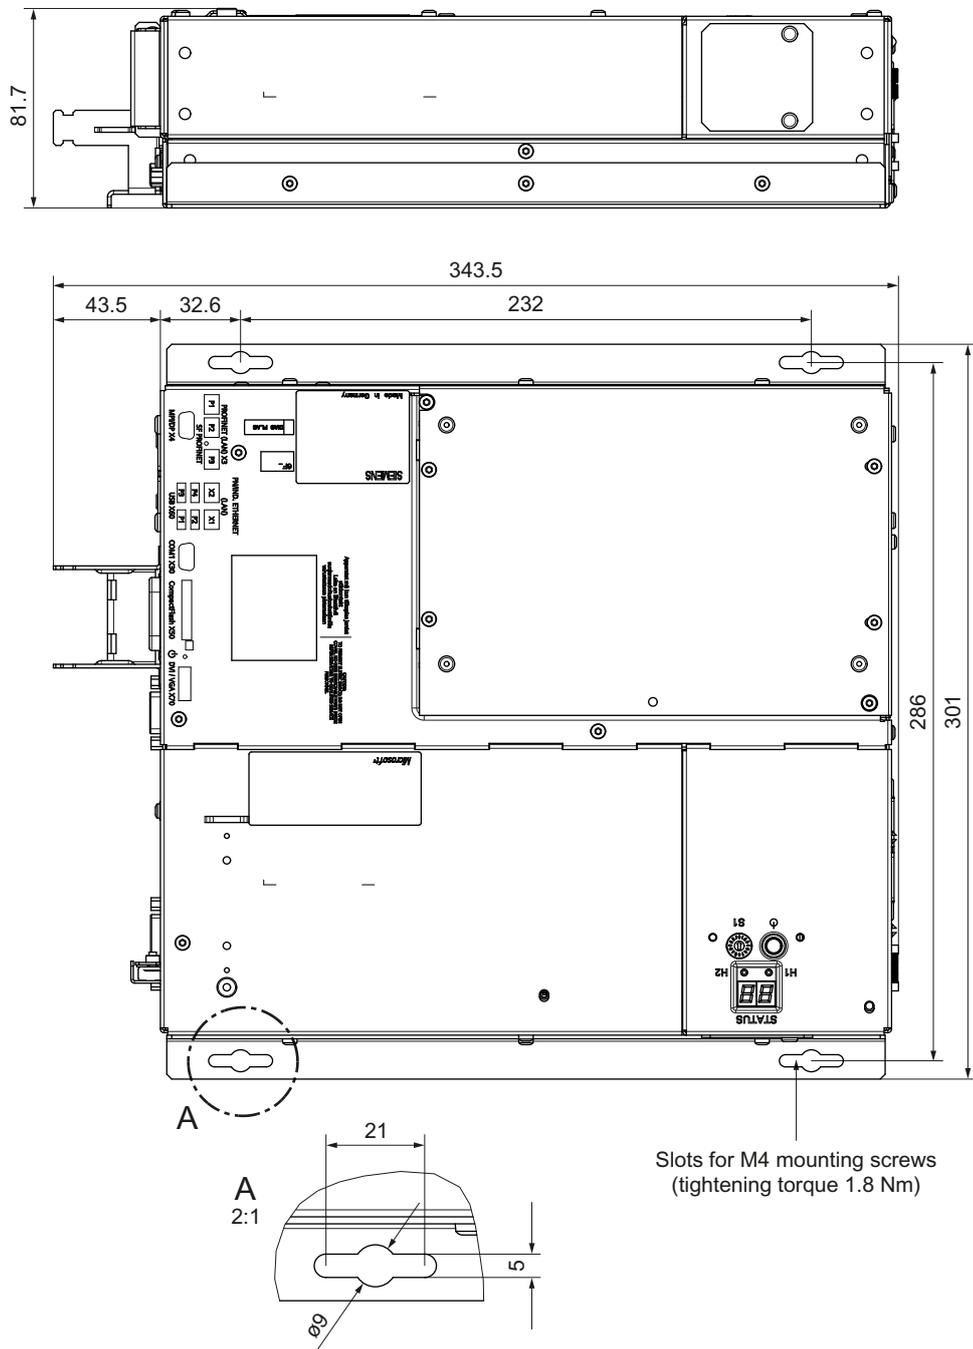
Dimension drawing, PCU 50.5 mounted flat
